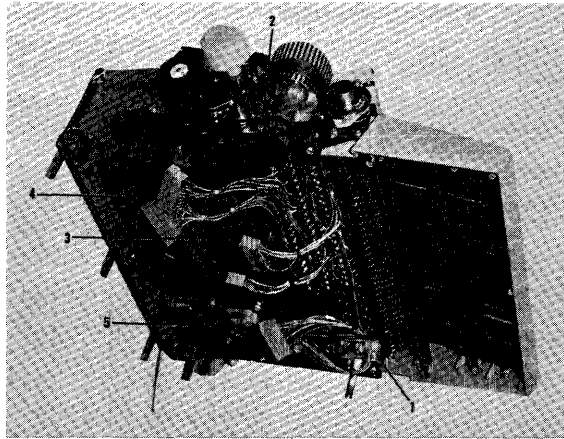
Hammer and Print Belt Assembly (Bottom View)—TermiNet 300 Printer
